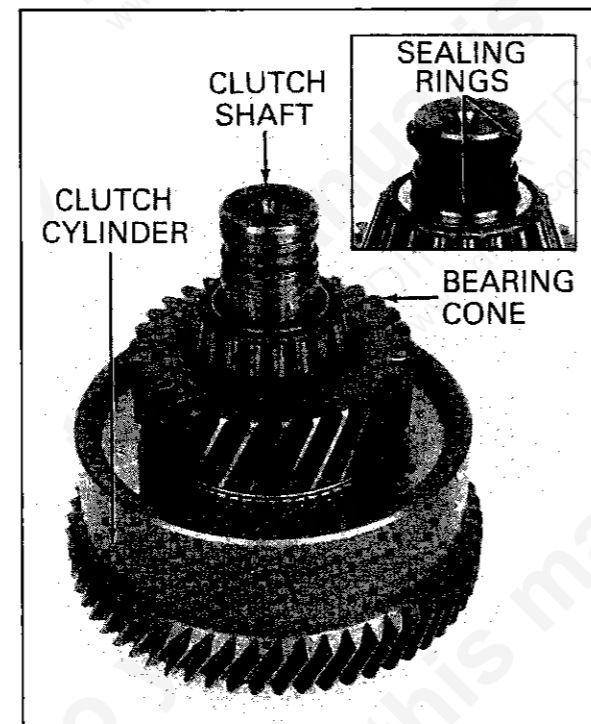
CLUTCH SHAFT BEARING CONE INSTALLATION
